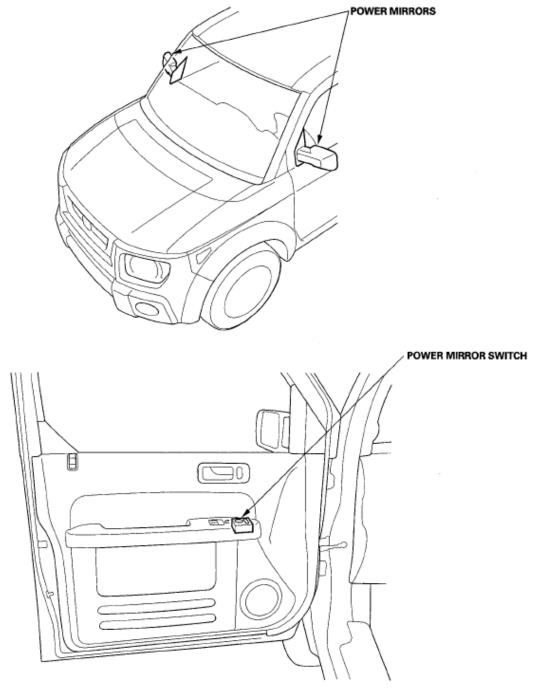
Identifying Power Mirror Components Location Courtesy of AMERICAN HONDA MOTOR CO., INC.
